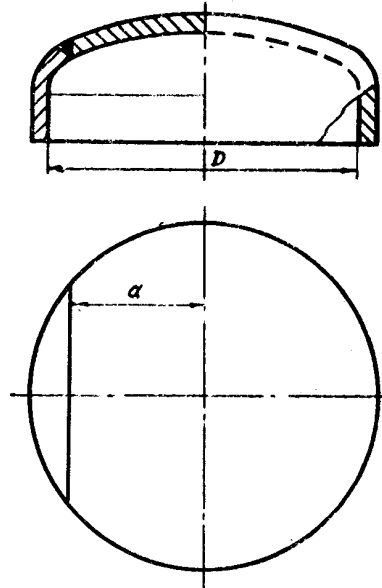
Arrangement of chord welds on the bottom, $a \leq 0,2 D$
